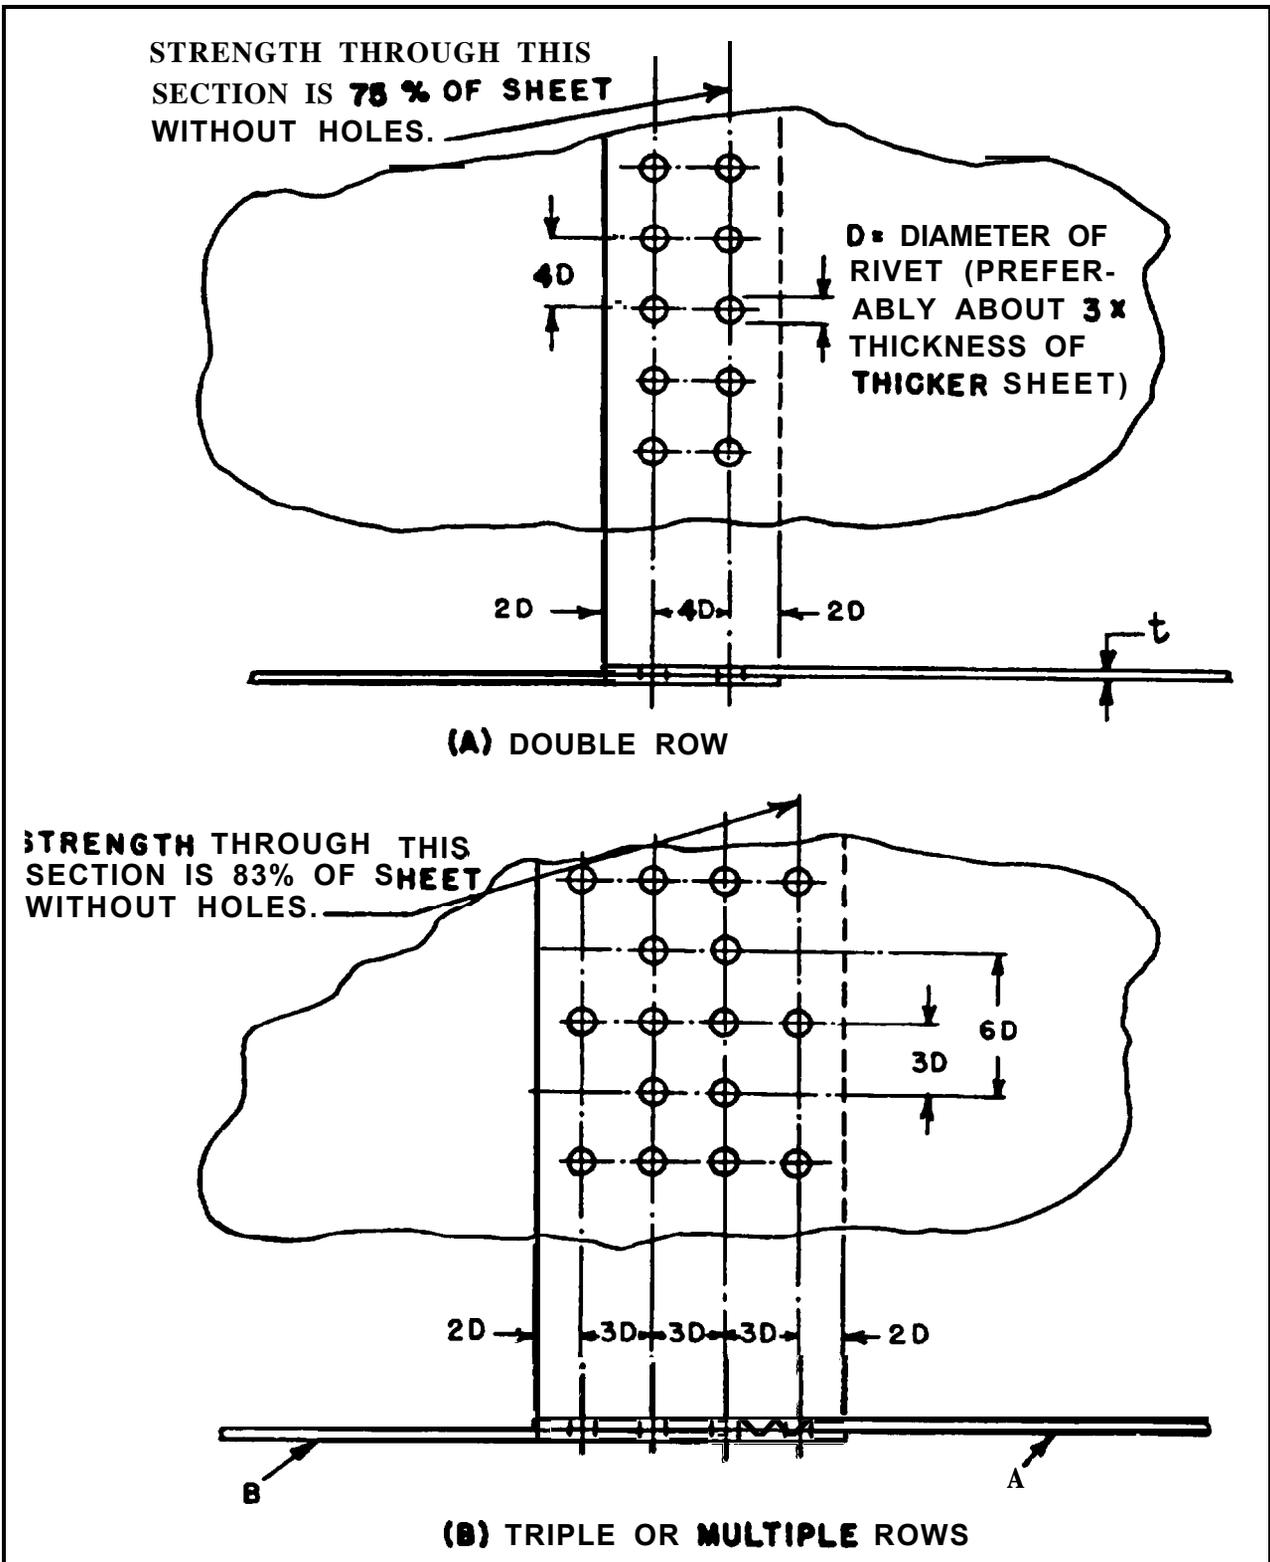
Rivet hole spacing and edge distance for single-lap sheet splices.
